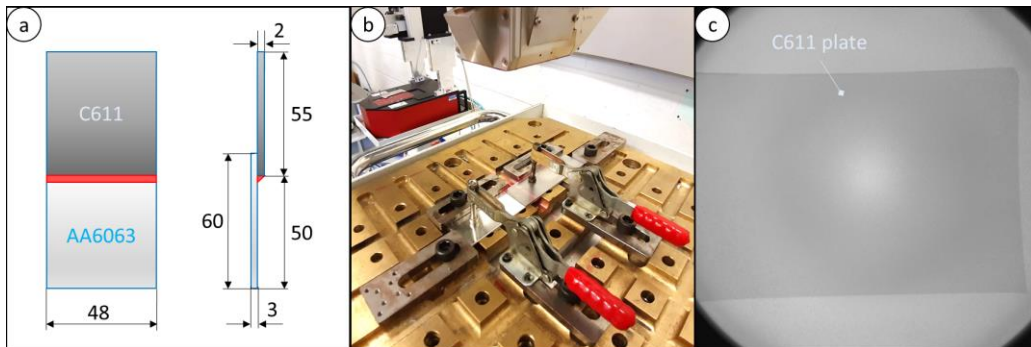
Experimental setup: (a) weld joint geometry, (b) laser welding setup, (c) example of X-ray examination of C611
